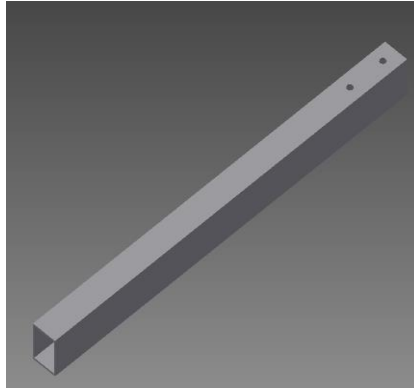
Square tube draft. CAD draft of the square tube; used for the legs in the mechanical system.
